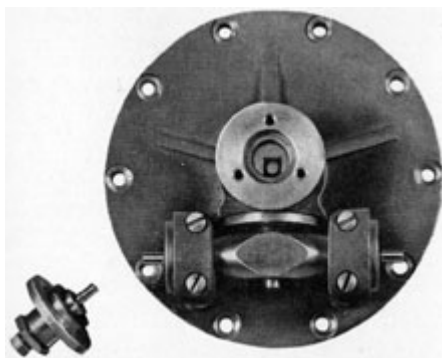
Bellows housing cover with housing end cap and stop rod removed, new installation.
